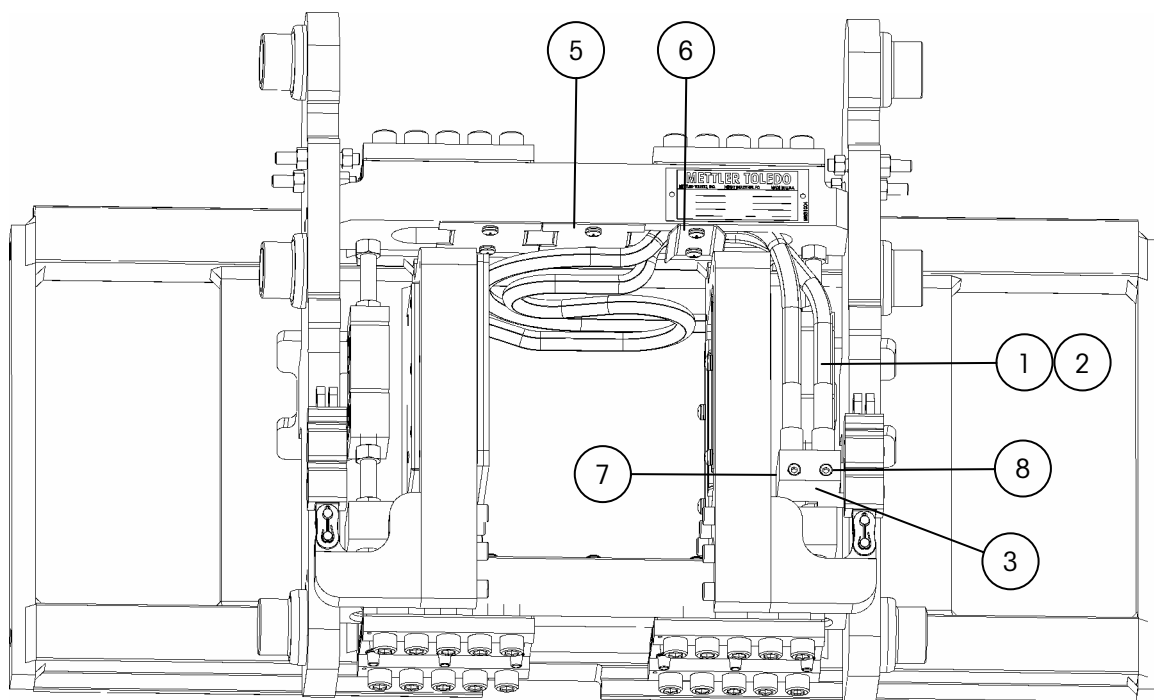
Side Shifter Assembly Kit (Simplex Version)
